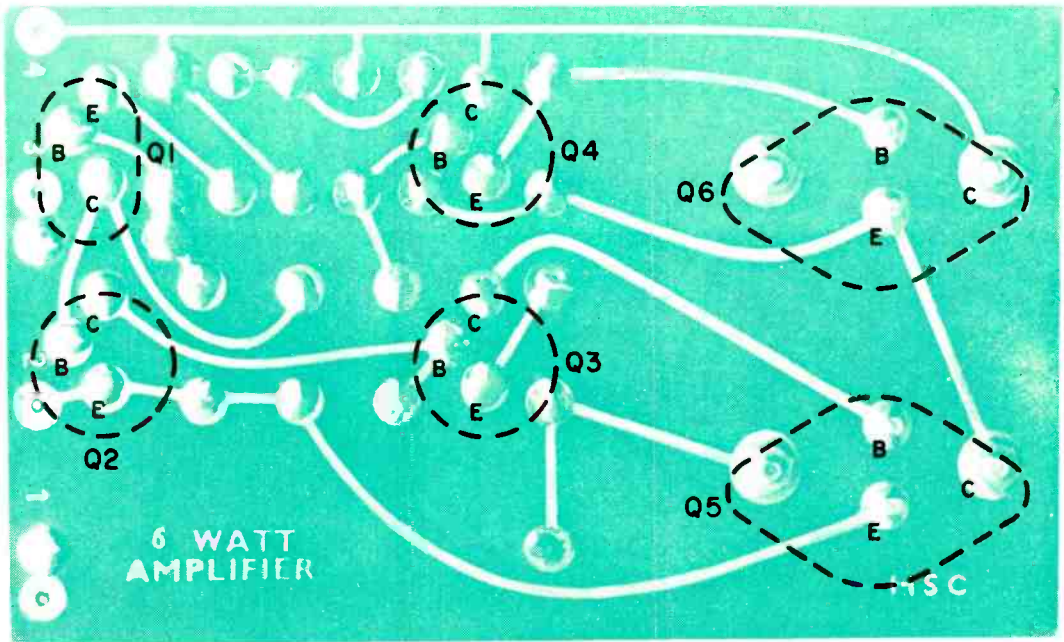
Use this full-size guide in making your printed circuit board. Space the transistors about $\frac{1}{2}$ " above the board and hold transistor leads on top side of board with a pair of long-nose pliers when soldering.
